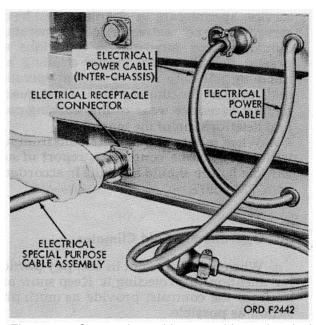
Connecting cable assembly to electrical receptacle connector in flasher chassis assembly.
